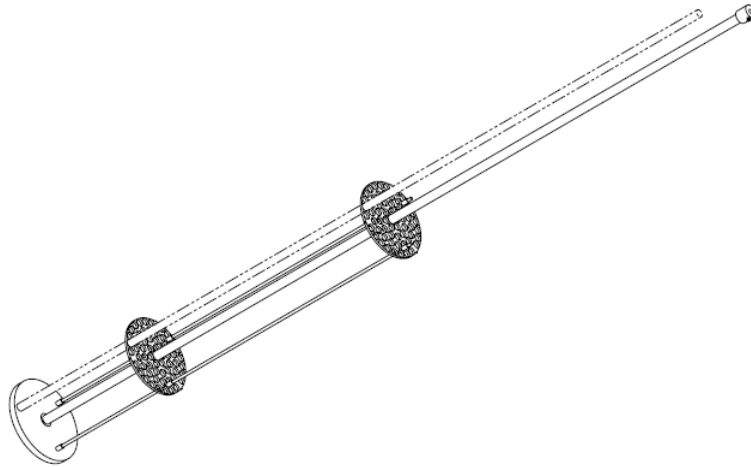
Assembly rack design for LANL fresh fuel PNAR measurements.
